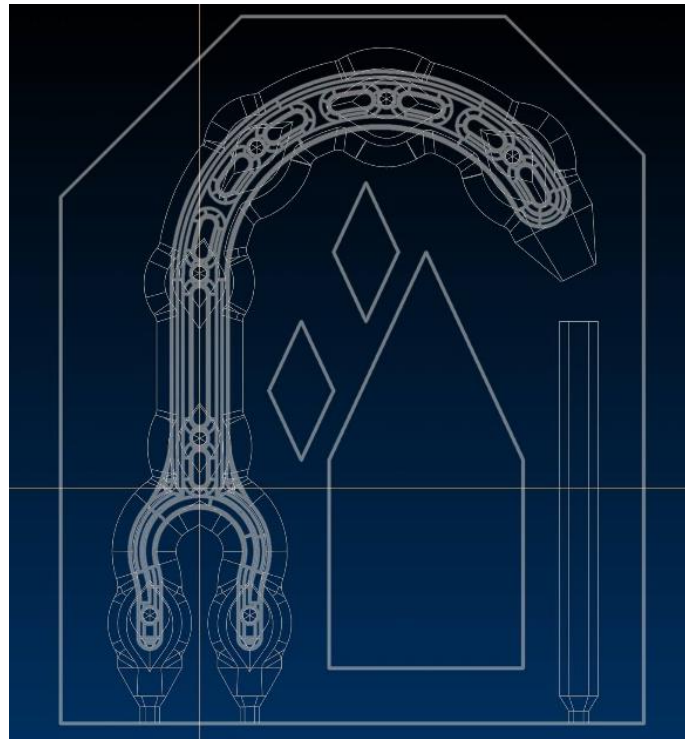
The developed internal design for 3-axis metal additive manufacturing
